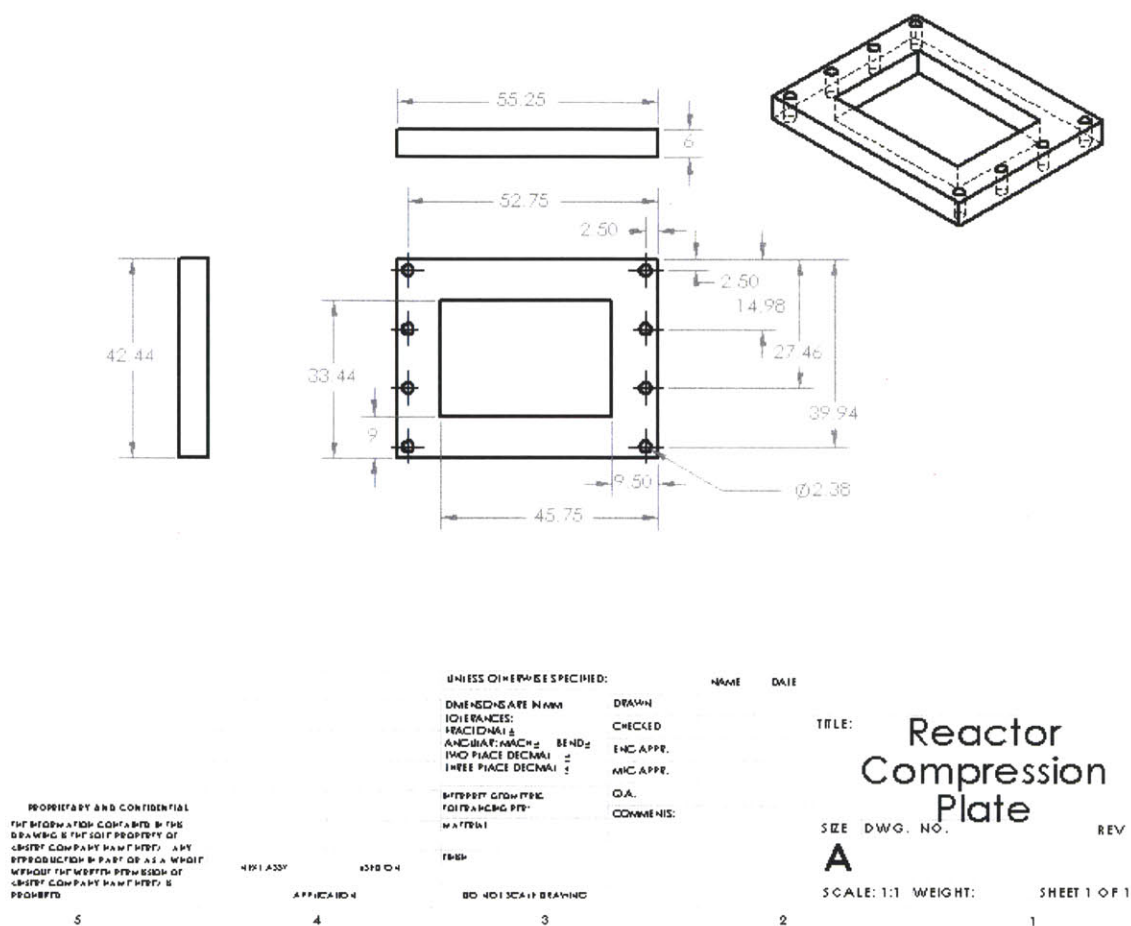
SolidWorks drawing of microreactor hot-side compression plate. Dimensions are in mm. Scale 1:1.
